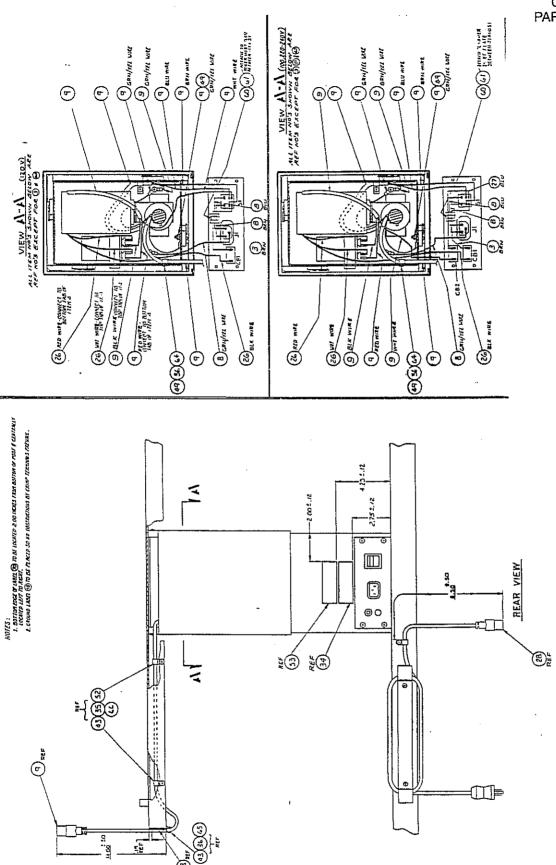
PARTS LOCATION DIAGRAM, VHA STAND ASSEMBLY (SHEET 2 OF 2)
